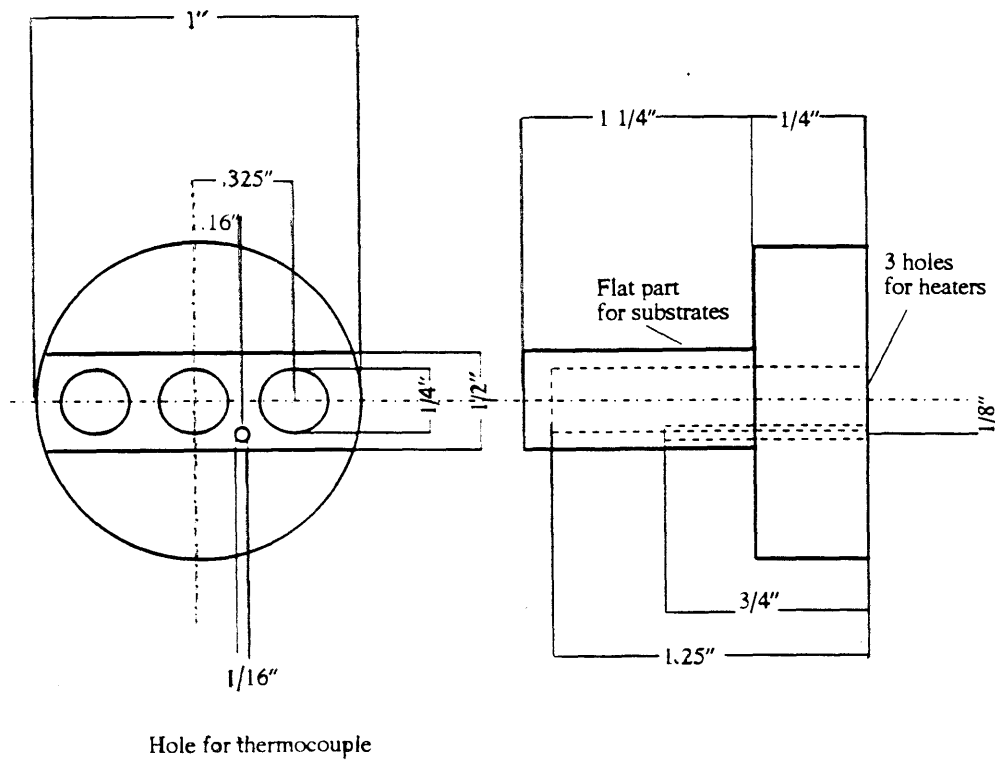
Simplified drawing of the substrate heater head. The welding grooves necessary to weld the head to a stainless tubing of wall size 20 mil were left out for simplicity. The three 1/4" holes contain the cartridge heaters.
